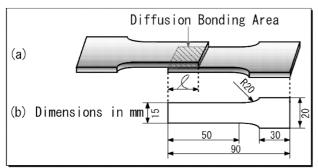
Geometrical configurations in bonding and dimensions of specimen.
